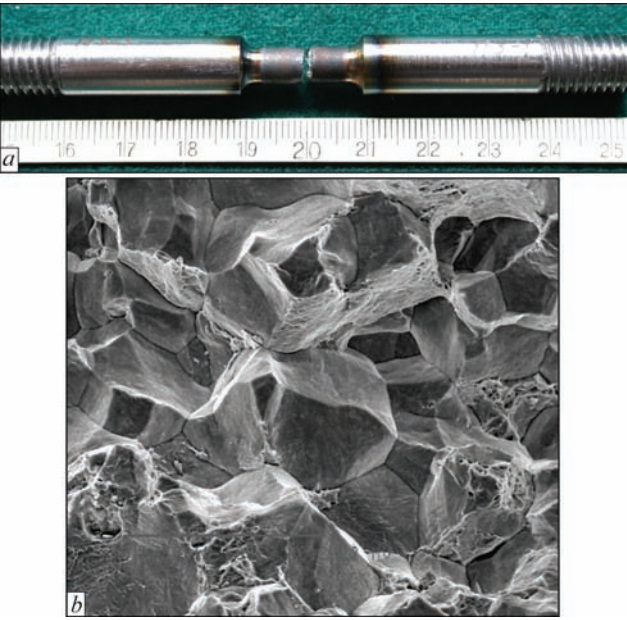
Nature of specimen fracture under conditions of development of secondary hardening in metal: *a* — specimen after testing; *b* — fracture surface (×600)
